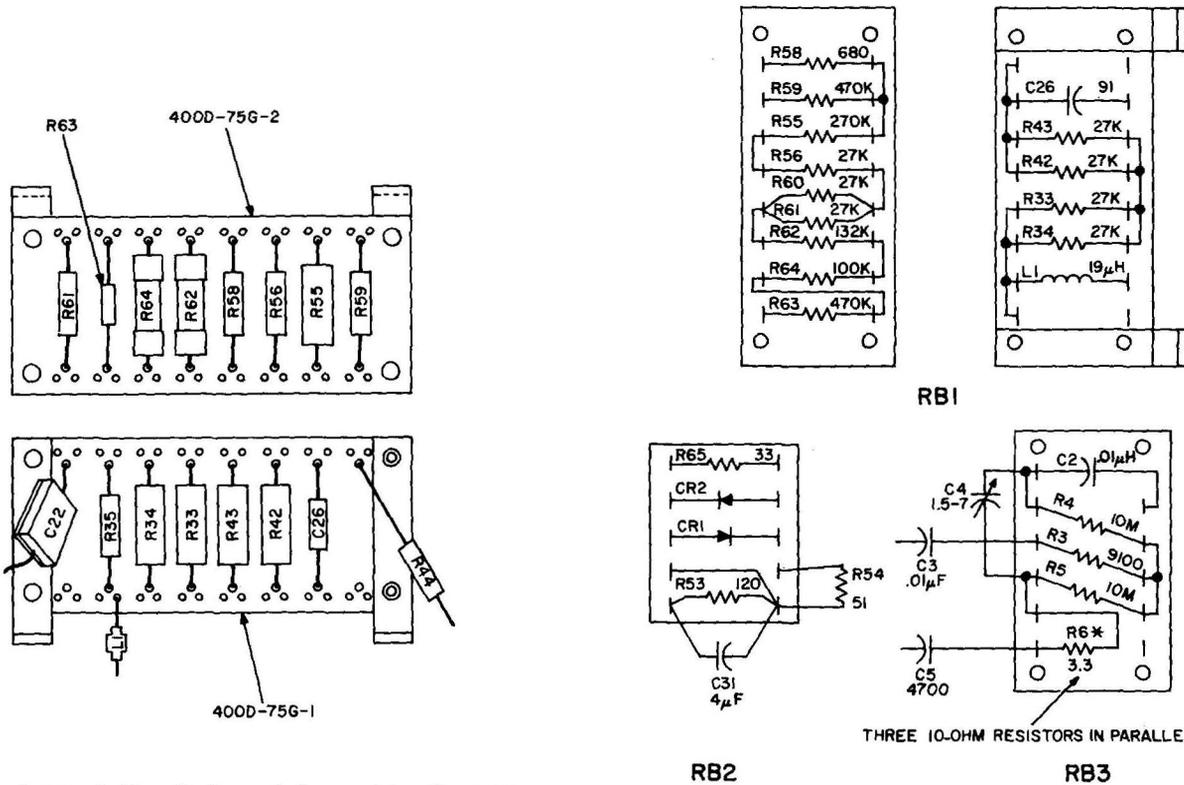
Printed Circuit Board Assembly, Part No. 400D-75G—Models Listed in 1.06
